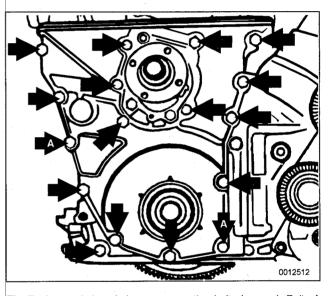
Lower timing chain cover mounting bolts (arrows). Bolts A are installed through hollow locating dowels.
